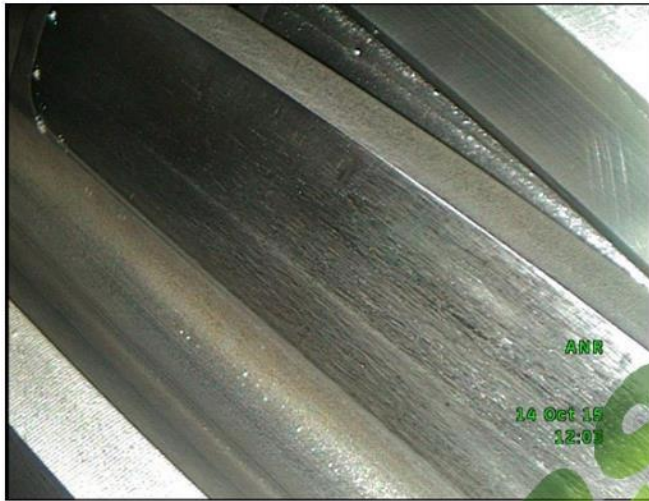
shows the active flank of the ring gear again. Small indentation visible at one of the flanks.
